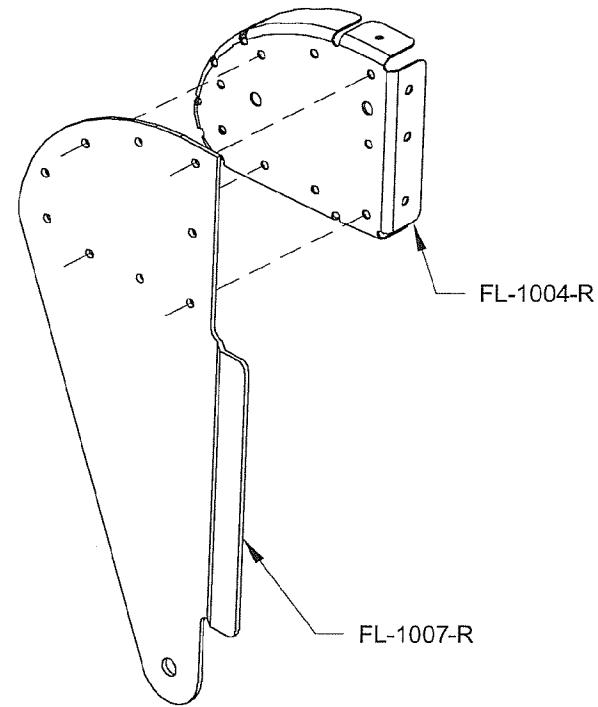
RIGHT HINGE PAIR RIB SUBASSEMBLY
